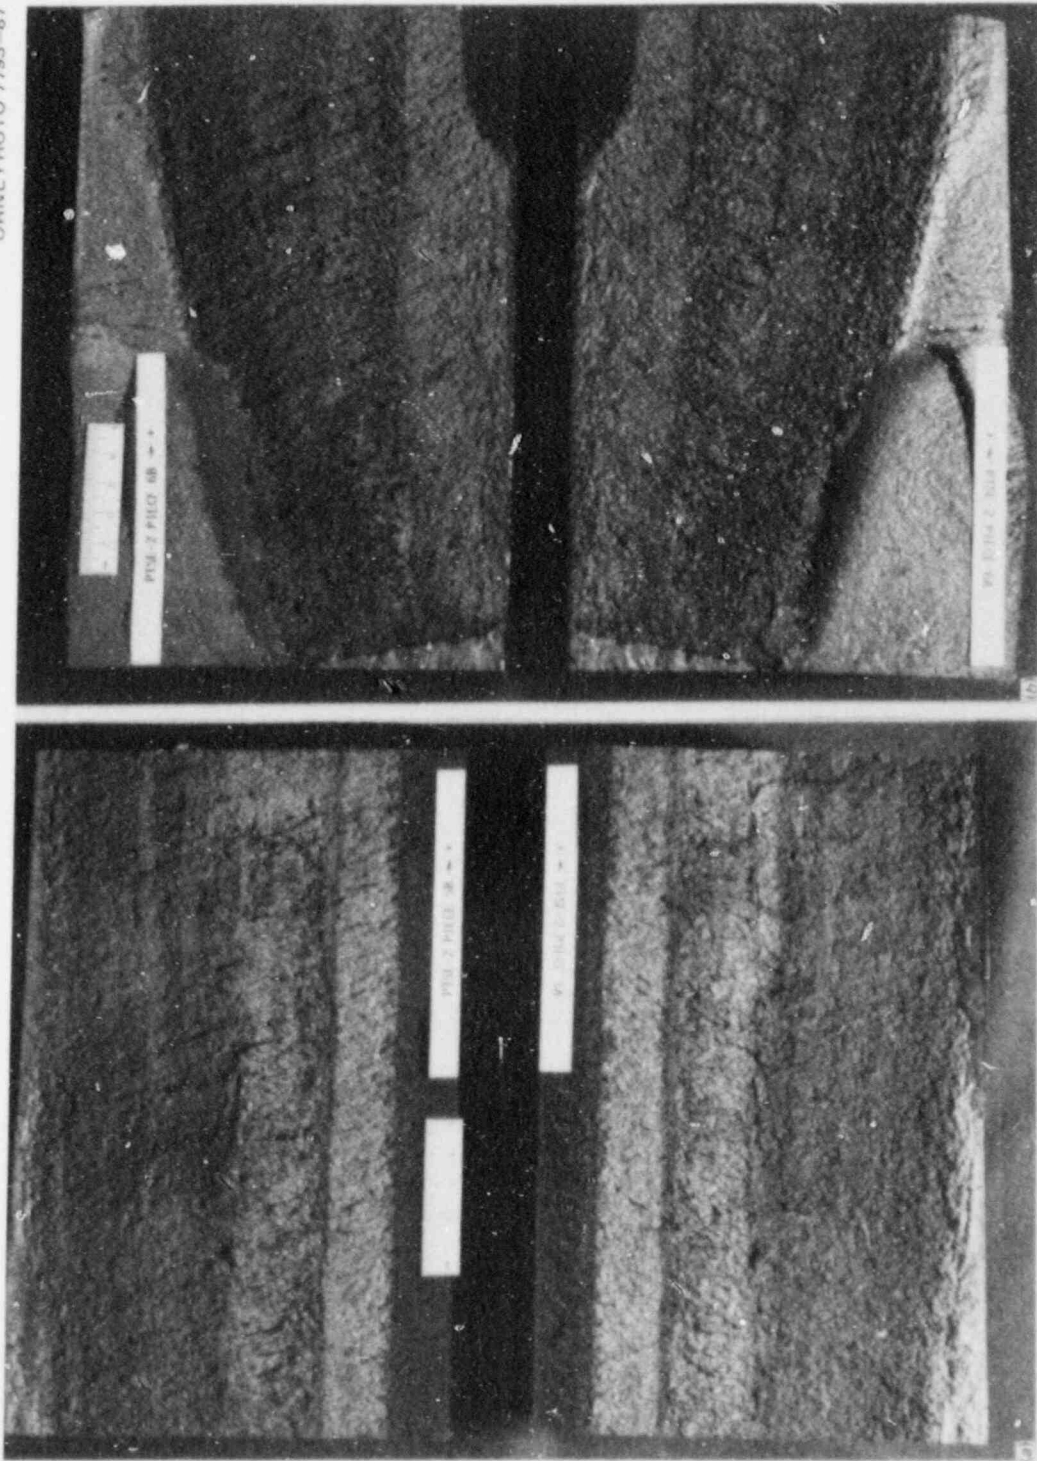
Photographs of mating fracture surfaces in (a) segment 5 and (b) segment 6.
